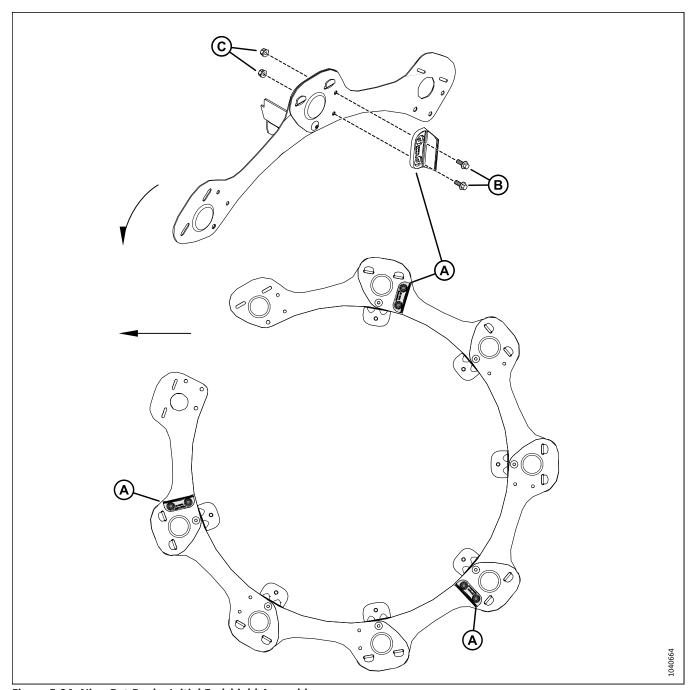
Nine-Bat Reel - Initial Endshield Assembly
